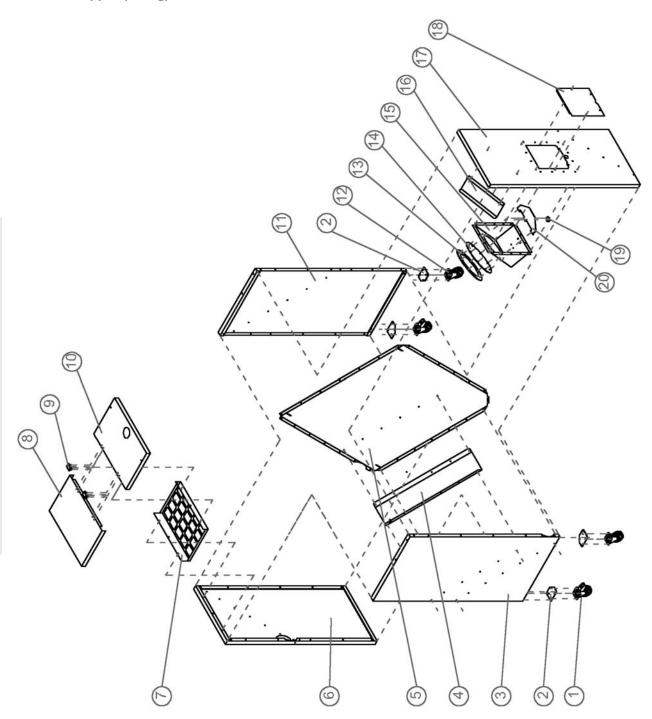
110kg Pellet Hopper Components - Exploded View
